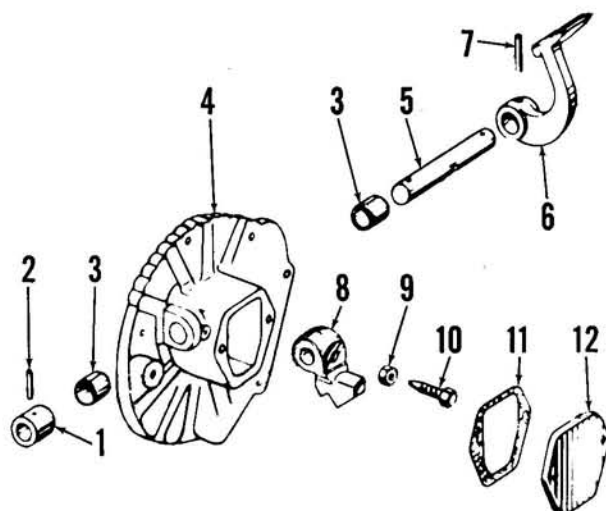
Exploded view of differential lock operating pedal and disc brake cover assembly.
